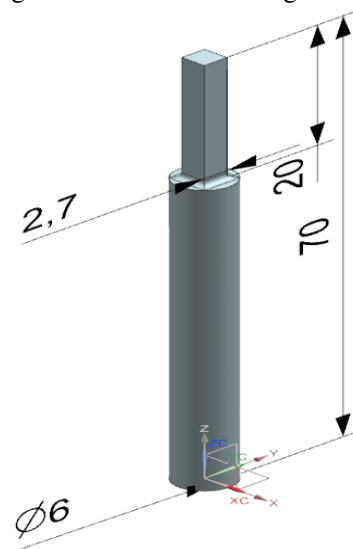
CAD model of the calibration artefact with nominal dimensions in mm.
